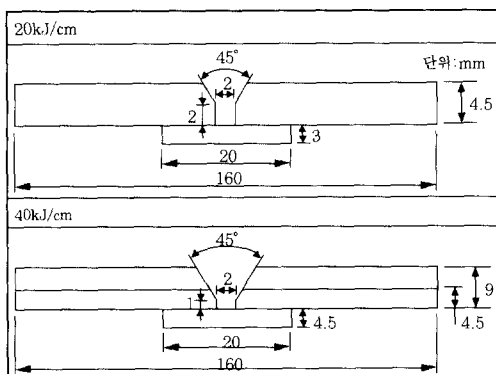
Joint configurations for 20 and 40kJ/cm heat input welding.
